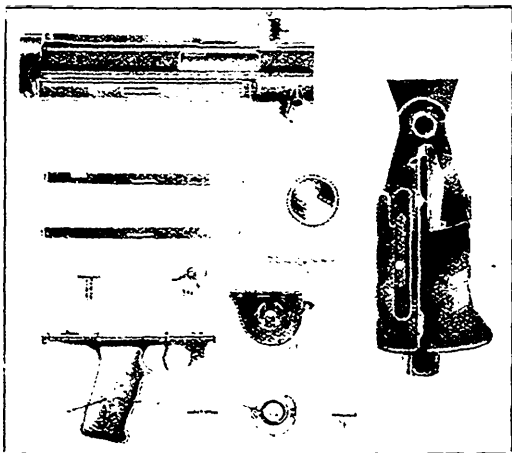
Gun Parts: Receiver Group. Mainspring and Trigger Mechanism
